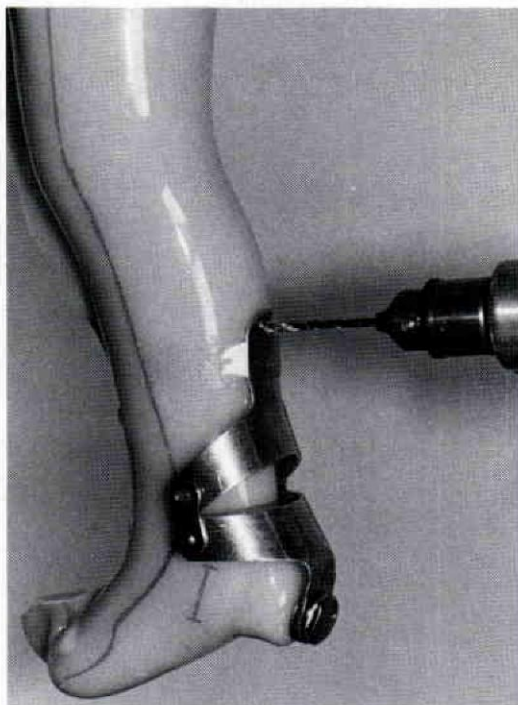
Assembly in place and holes for proximal attachment being drilled.
